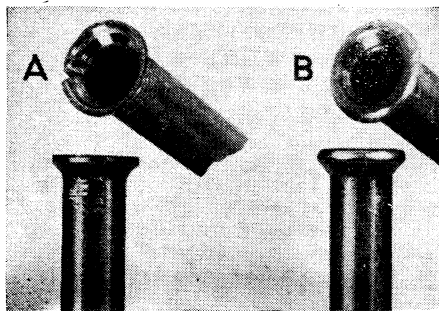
Showing advantage of double lap flare (B) on hydraulic brake tubing over single lap flare (A)
